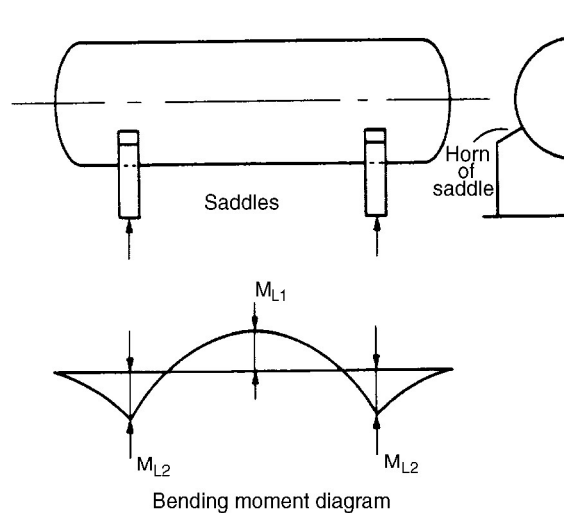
Horizontal cylindrical vessel on saddle supports
